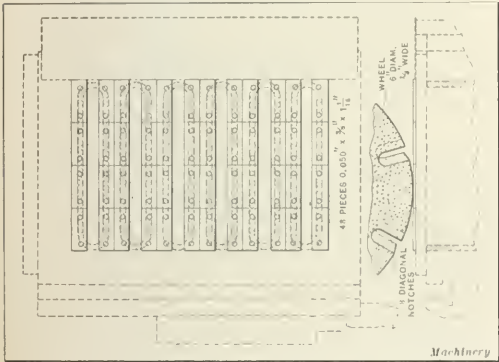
Diagram showing Arrangement of Pieces held on Chuck shown in Fig. 3.
